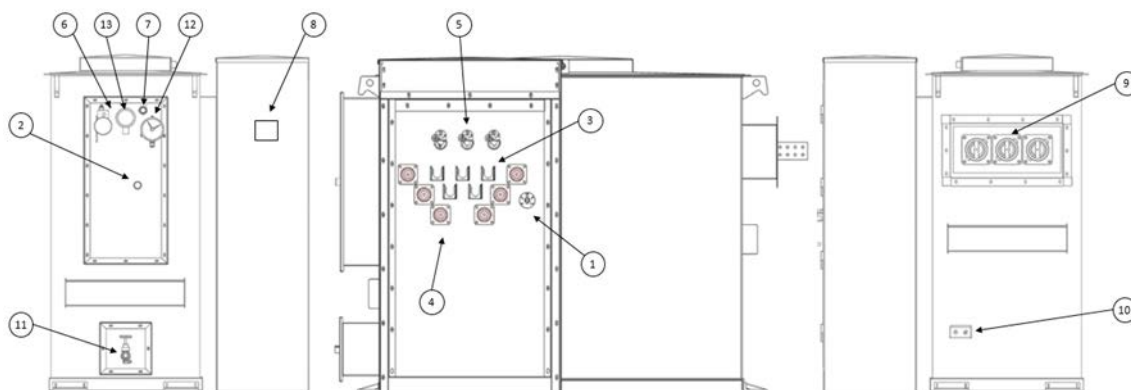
Three-Phase pad-mounted transformer with lateral LV connection: a) Gauges and accessories side, b) HV bushings and NLTC side and c) LV bushing side Gauges and accessories side.
